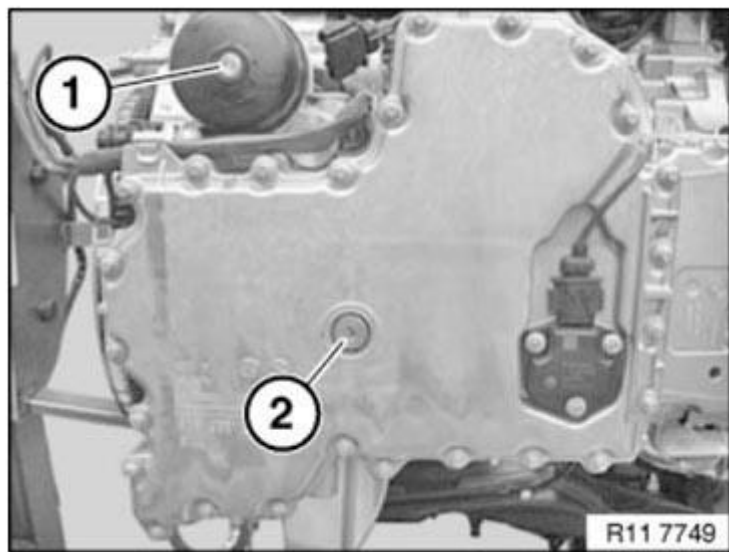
Identifying Screw Plug Of Oil Filter Cap And Oil Sump
